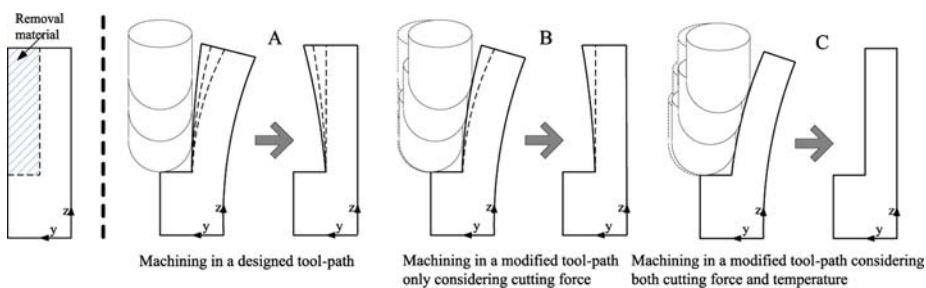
Tool path optimization in end milling—view along the workpiece length direction
